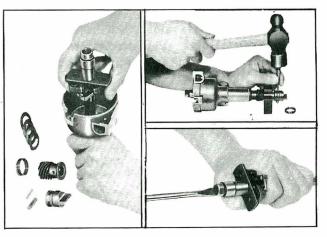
Disassembly of Coupling Shaft and Cam
